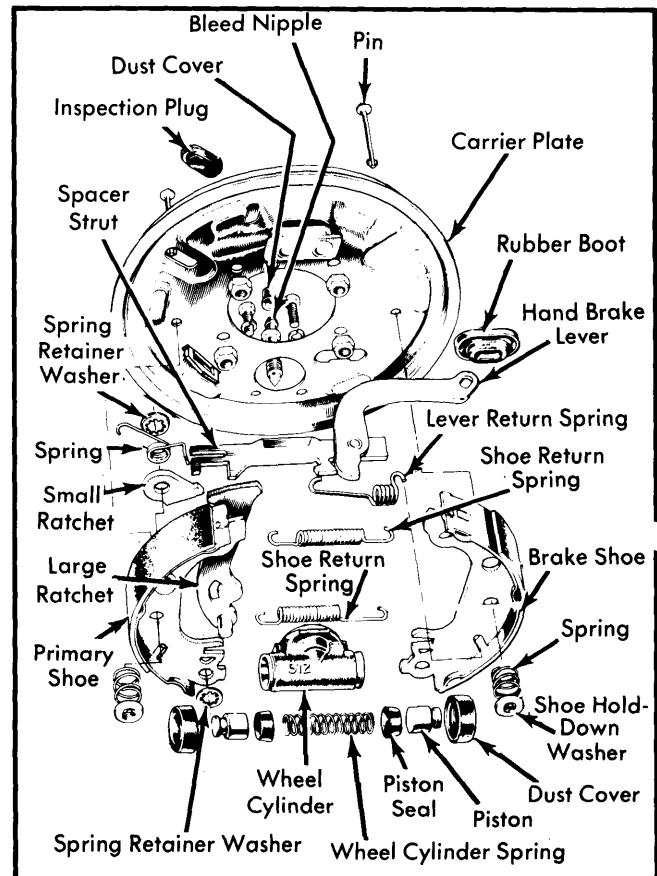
Exploded View of Fiesta Rear Brake Assembly
